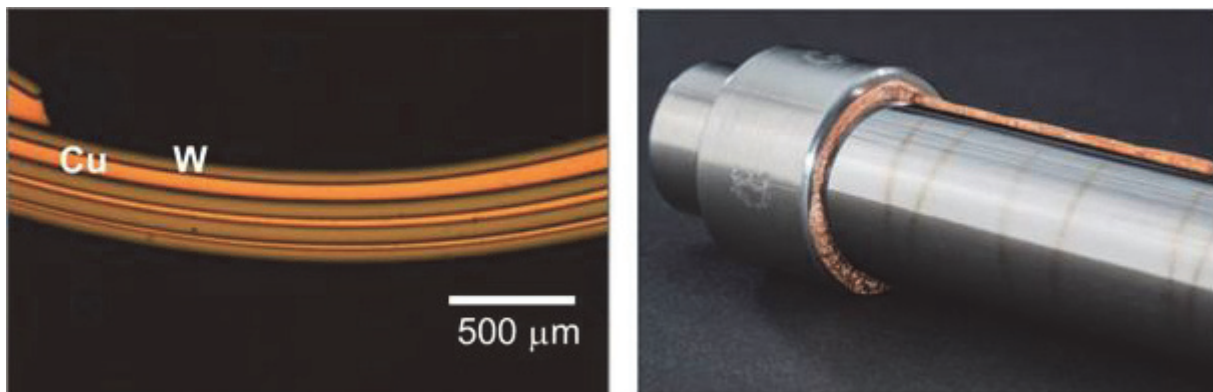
Left: By rolling up and joining a W laminate pipe can be produced. These pipes have extraordinary mechanical properties. Right: A W-Cu laminate pipe is joined on both ends to a pipe made of austenitic steel. The joining of W laminate pipe to steel pipe works excellent.
